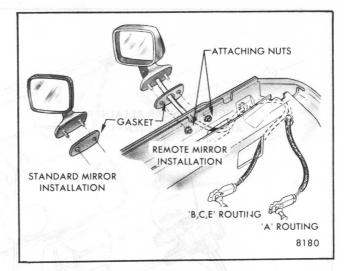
Door Outside Mirror - Typical All "A, B, C, E and H- 07-27" Styles - Left Side
